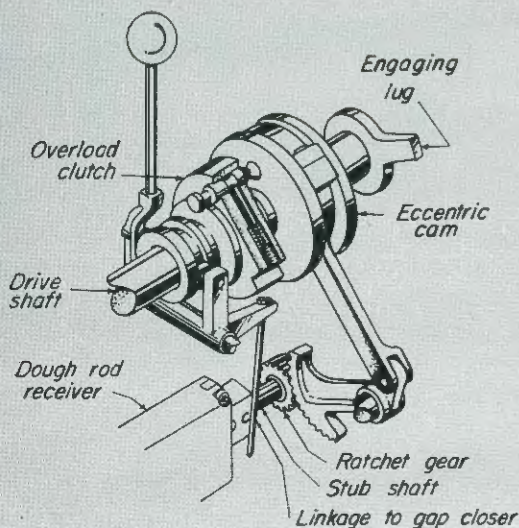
Left—Detail of right-hand side of tying head, showing engaging lug, dough rod receiver drive and overload clutch
